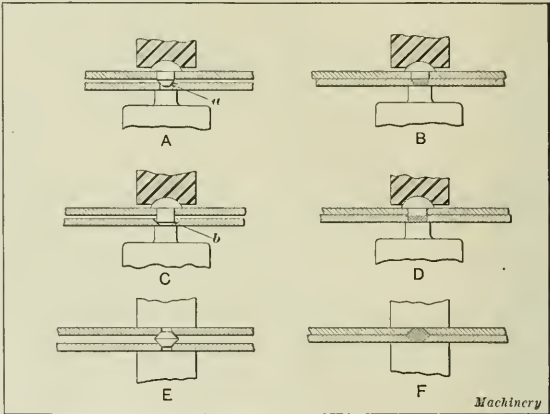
Diagram illustrating Various Processes of accomplishing Electric Riveting on a Spot-welding Machine
